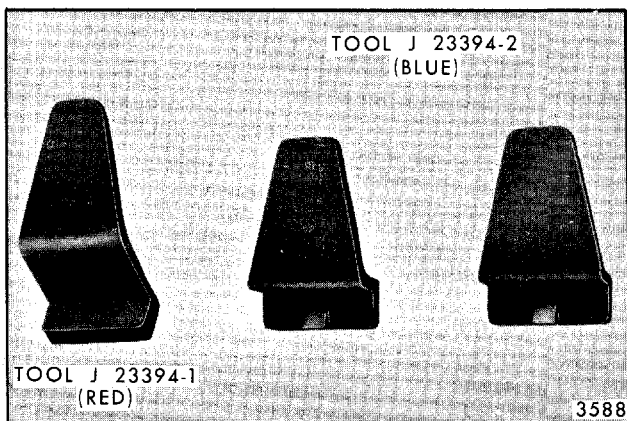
Glass Alignment Gauge Blocks - Tool J-23394 or Equivalent (Set of Three Blocks) - "F" Styles
